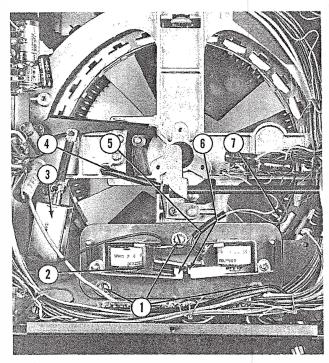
ELECTRIC SELECTOR ASSEMBLY
